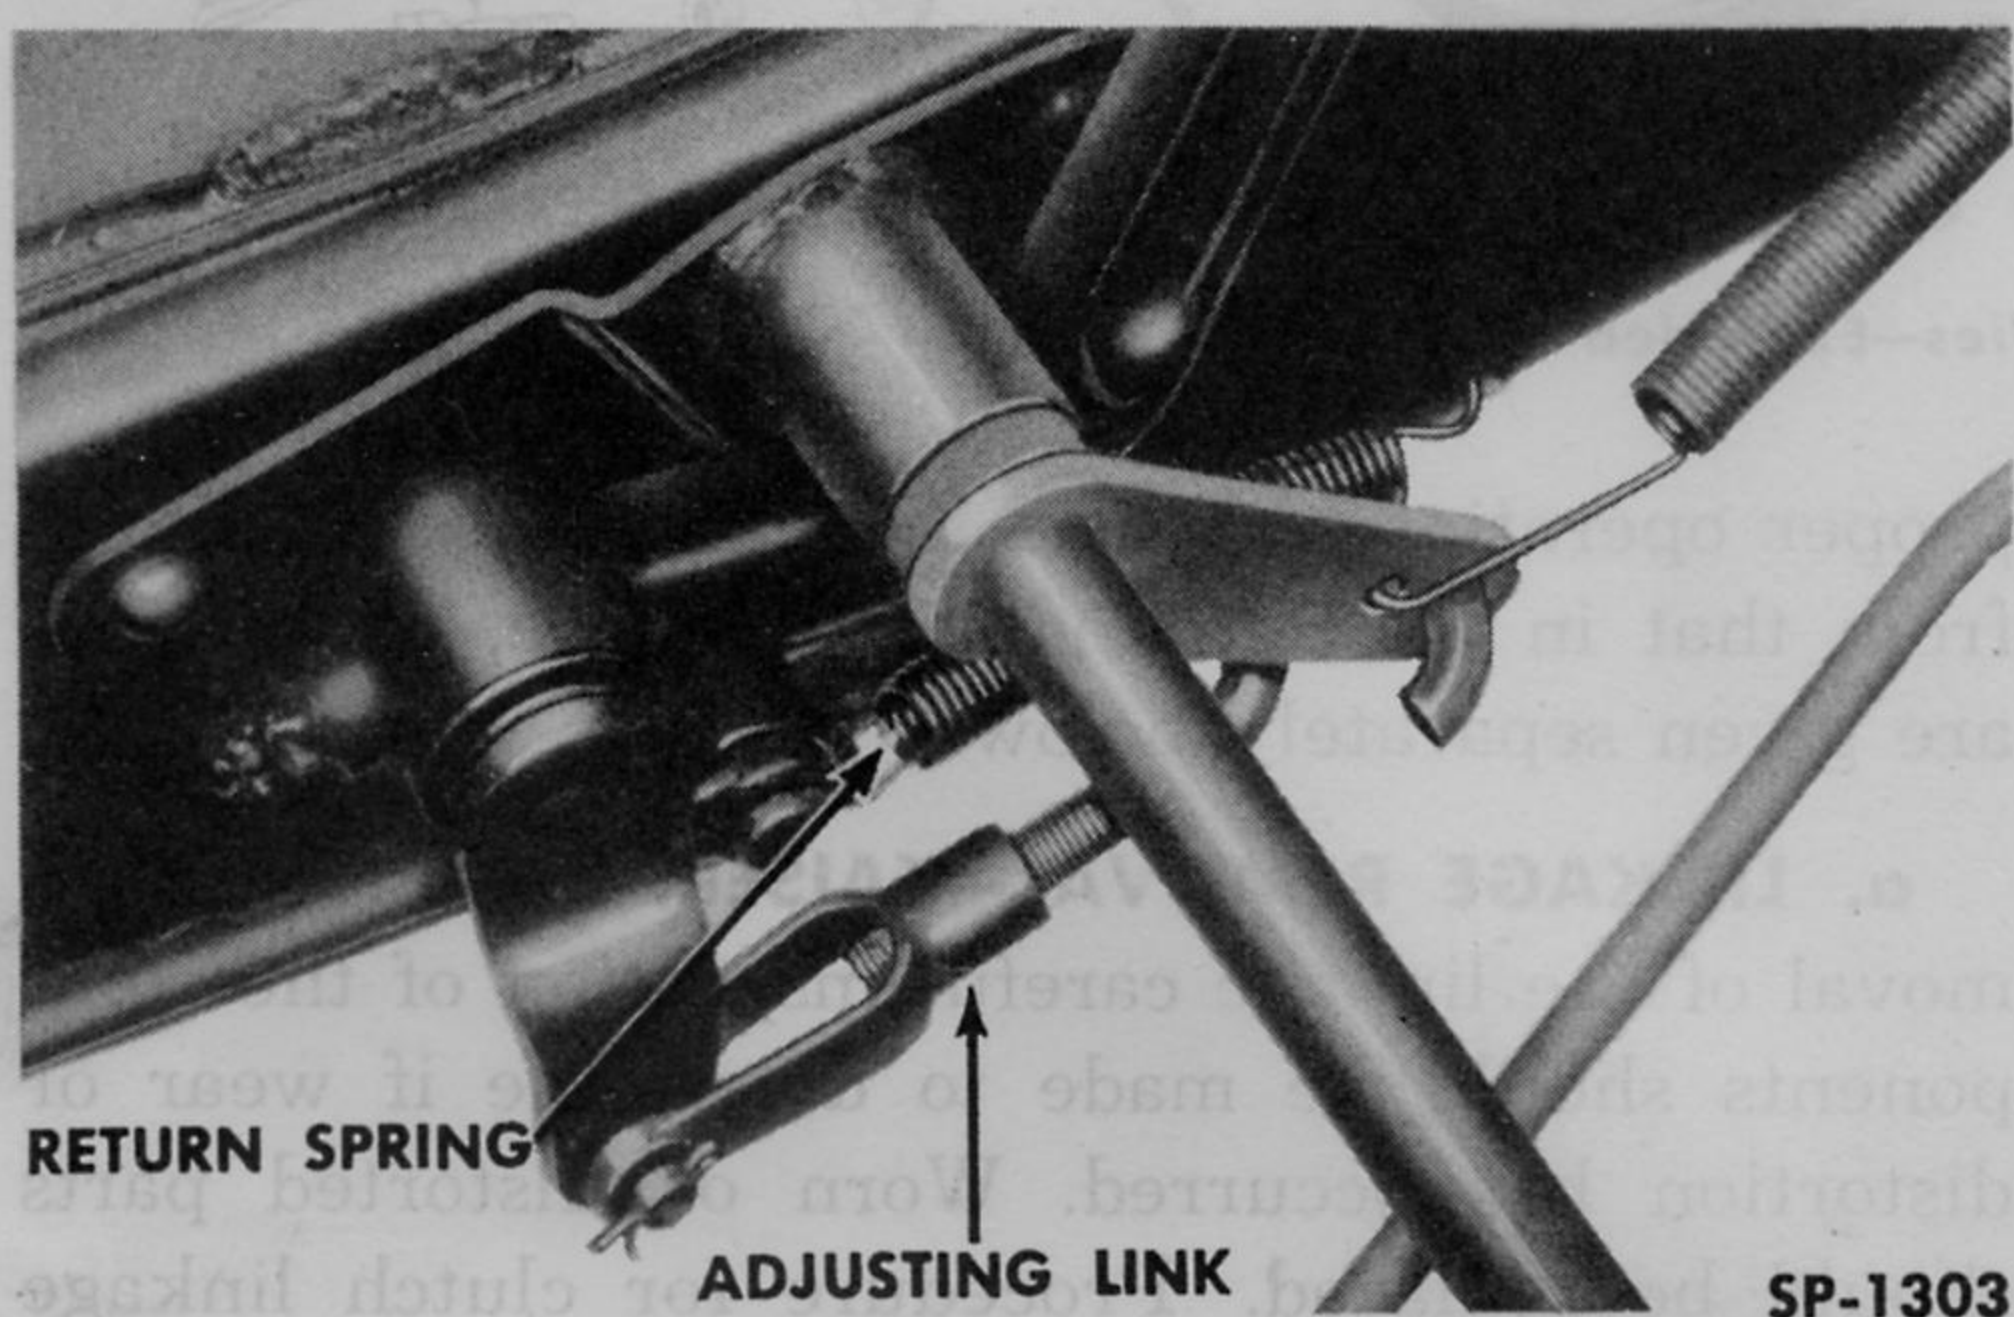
Frazer Clutch Pedal Linkage Adjustment
